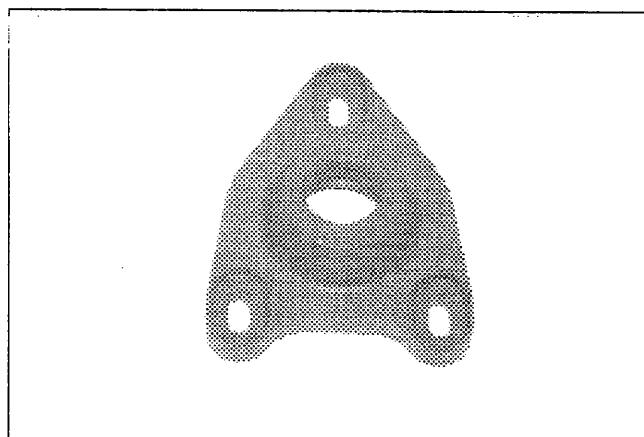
(REAR REINFORCED TOP MOUNTING PLATE : TYPE B)
